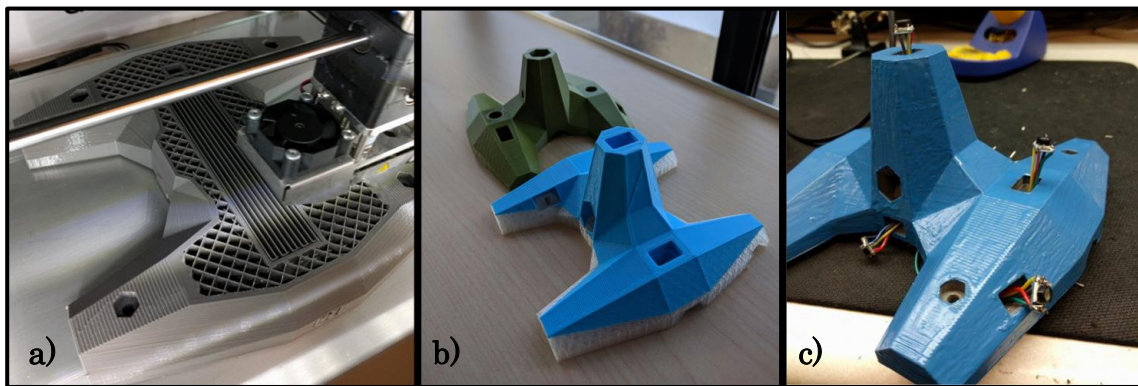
a) During 3D Printing, b) After 3D Printing, c) After circuit assembly
